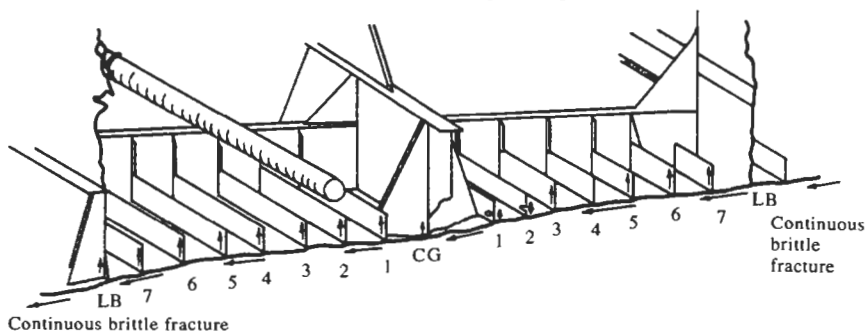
Crack propagation during the first incident—bottom shell fracture.
